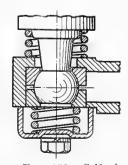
Self-adjusting socket joint. The sheet-metal spring cover is held in place by two screws.
